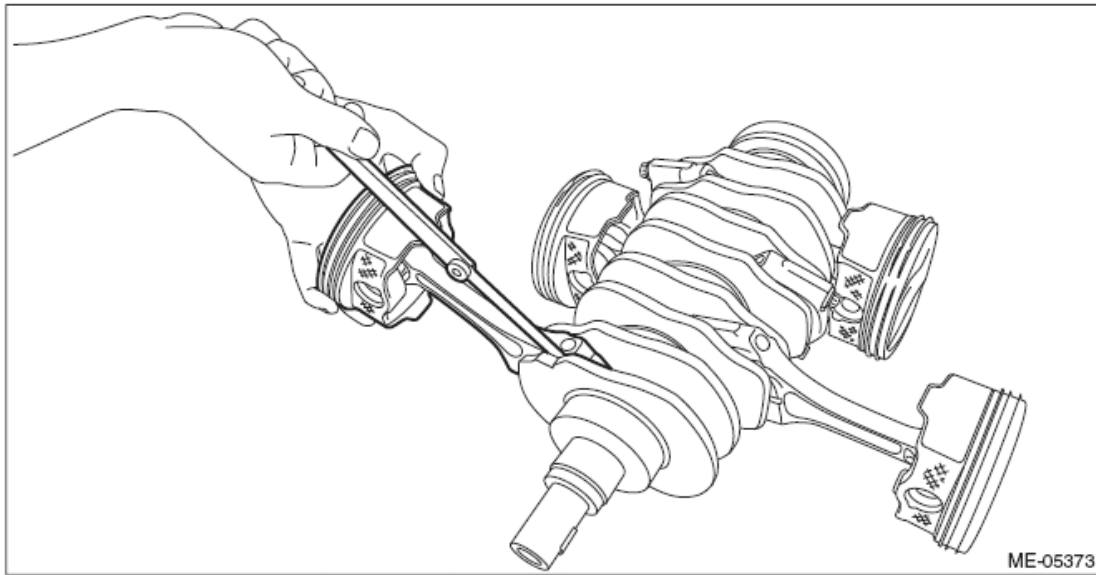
Measuring Thrust Clearance Of Connecting Rod
